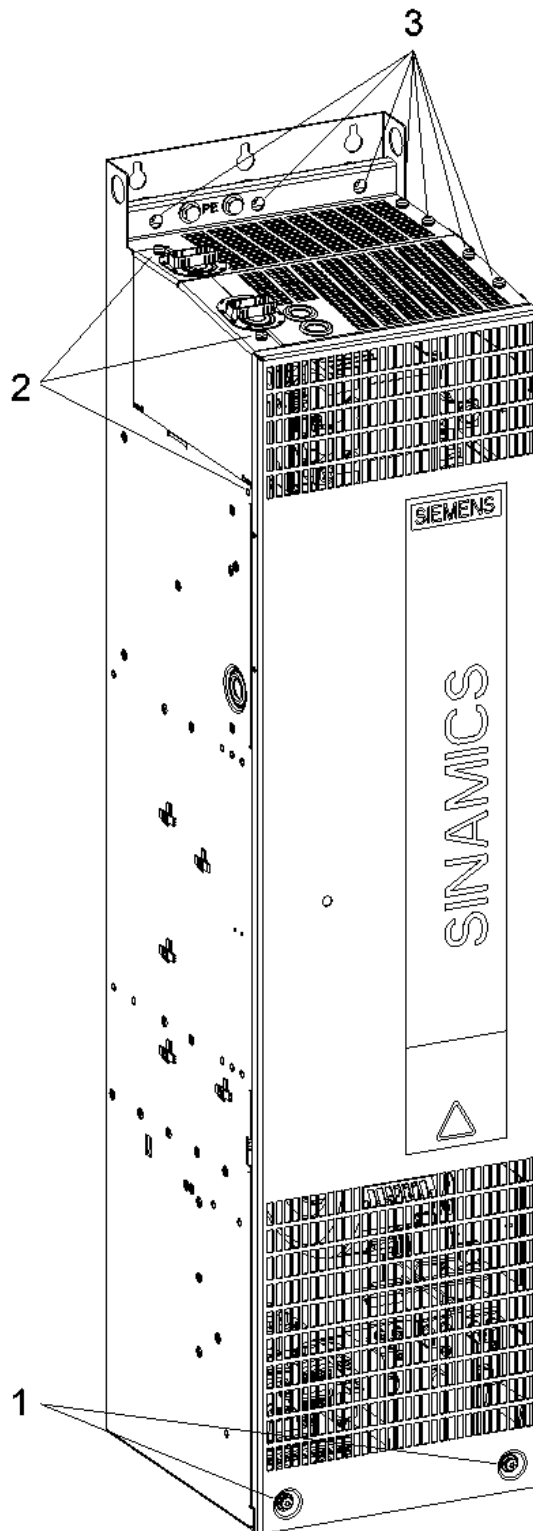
Installing a Braking Module in an Active Line Module or a Motor Module (type FX) – steps 1 - 3
